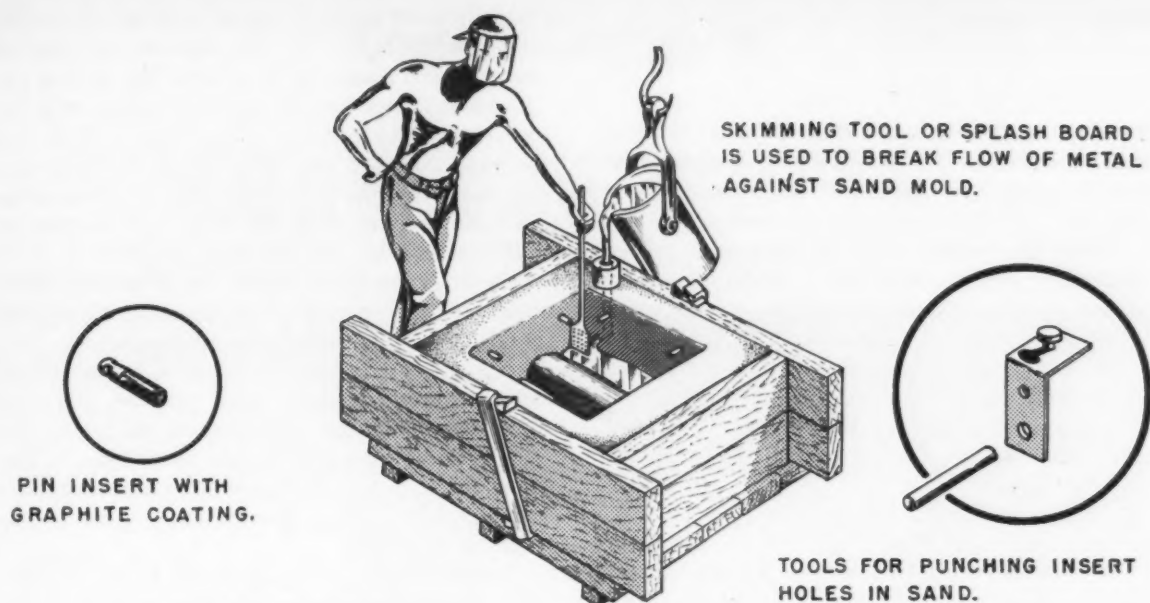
Casting the zinc die. Dotted lines indicate pouring holes in the cone cast gate and sand.
